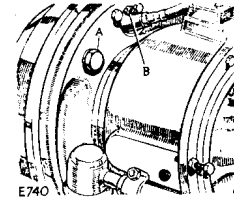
Wheel brake adjustment, Rover 8, front and rear
